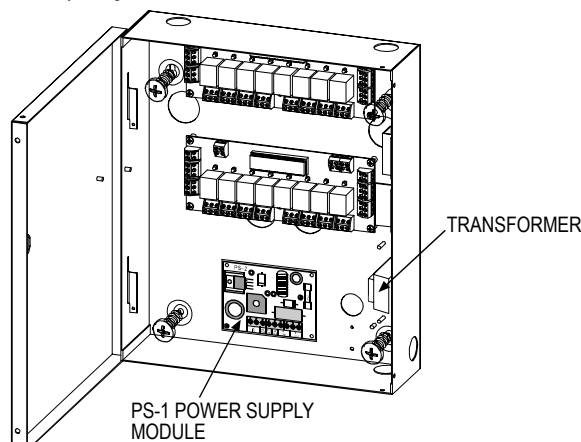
Mounting Two IOX-4 PCBs in EXT-100 Box
